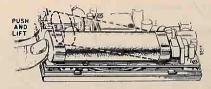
View Showing Method of Removing Battery Holder from Chassis Board.
